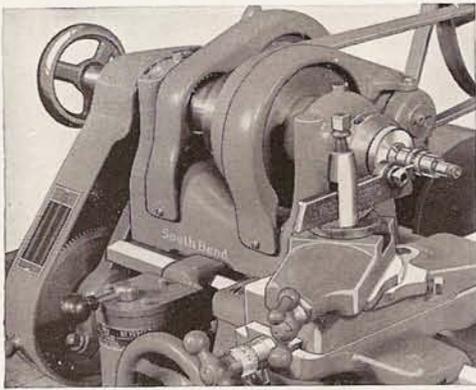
The 9-inch "Workshop" South Bend Lathe is a practical Lathe for School Machine Shops.
